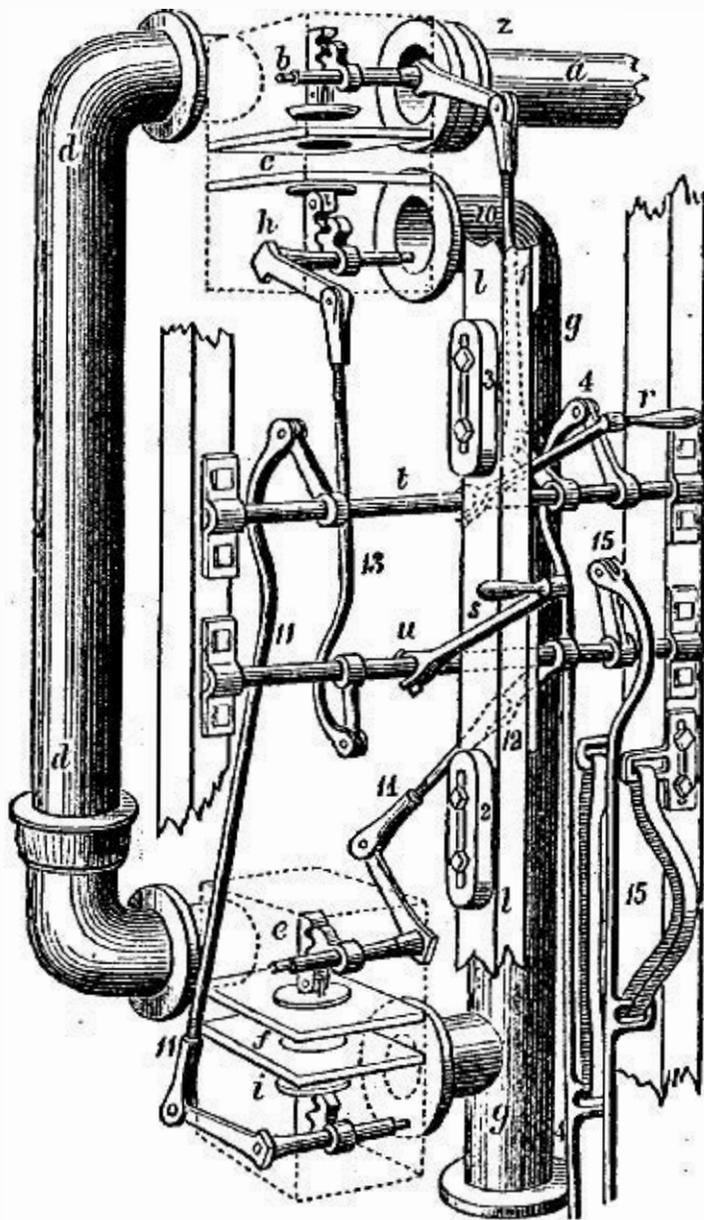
Valve-Gear of the Albion Mills Engine.
